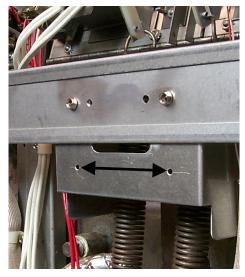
Attach the new spring guard, which covers the element springs, to the new rear brace, then install the assembly into the fryer. The guard prevents wiring from being pinched in the springs. Use lower holes (arrows) to mount guard on later model fryers.
